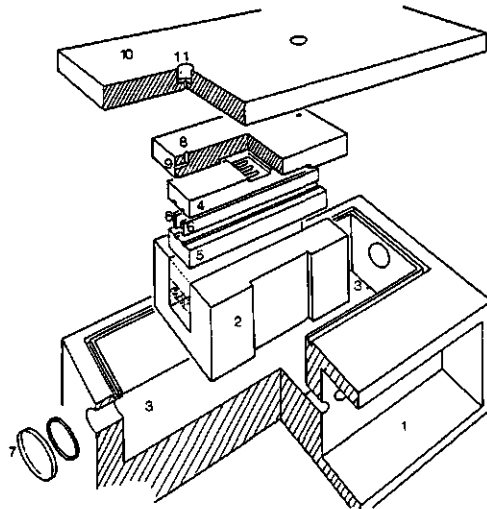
Exploded view of the Stark cell showing the photoacoustic section and the electronic preprocessing compartment
